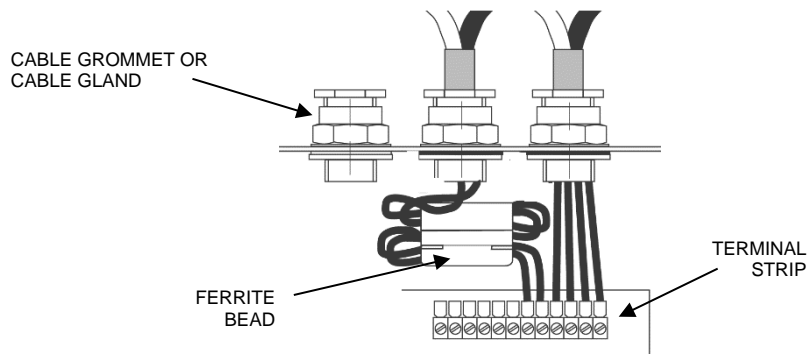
Example of a connection, using a cable gland and ferrite bead
